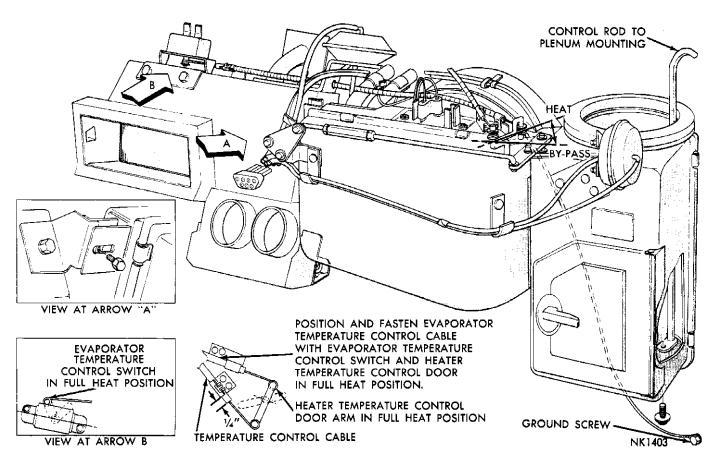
Heater and Evaporator Assembly—Passenger Side—Typical
